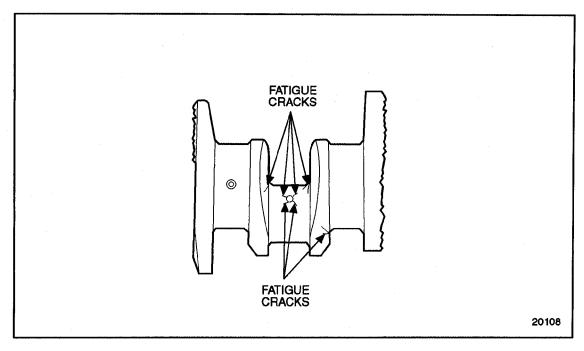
Crankshaft Fatigue Cracks
